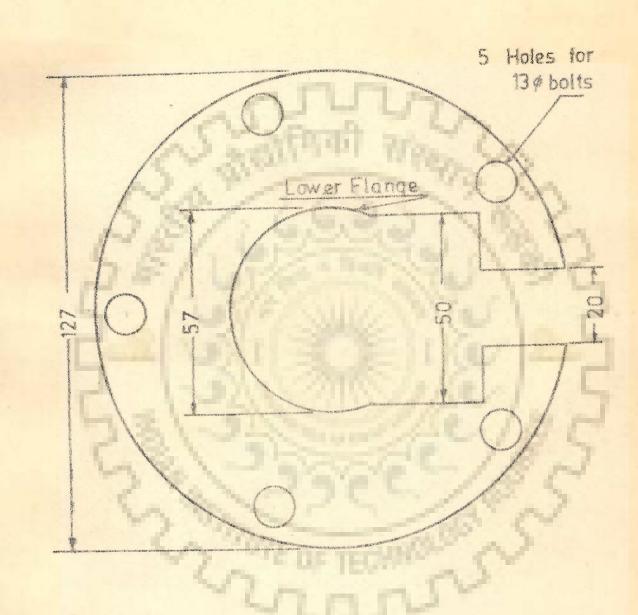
SPECIAL FLANGE FOR SOLID REMOVAL SYSTEM
